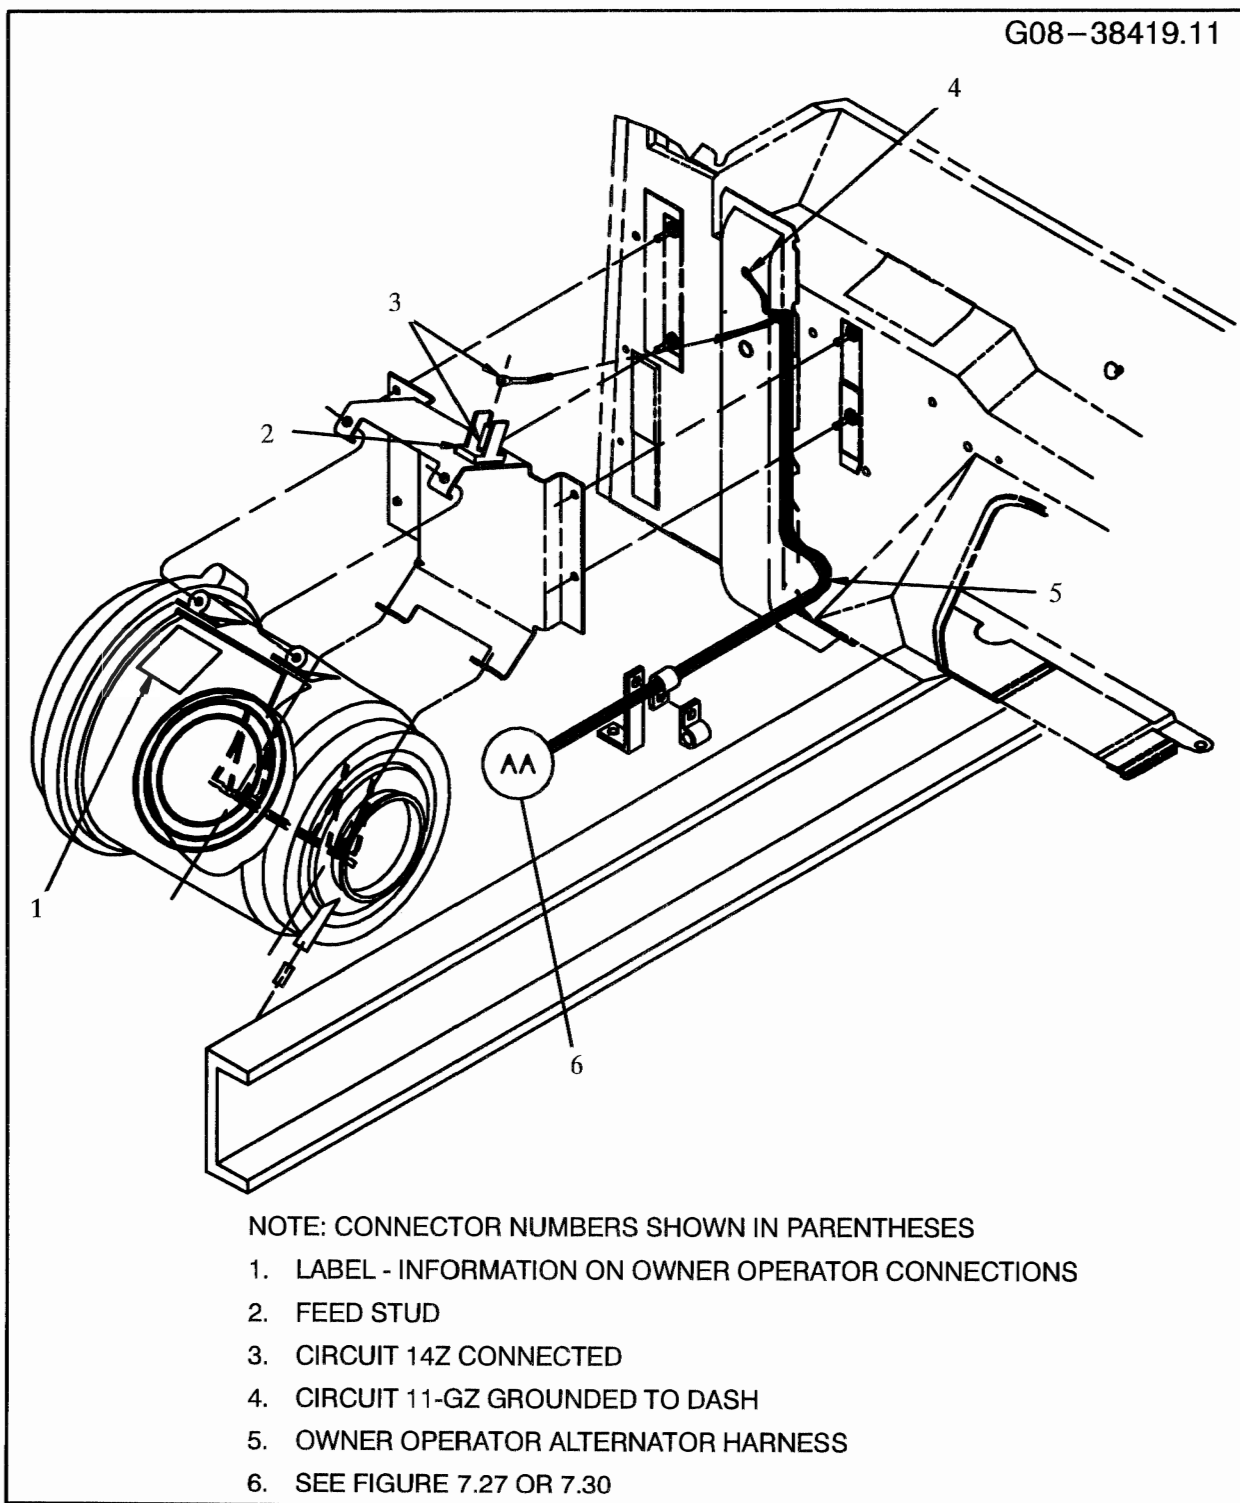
V8 Electronic Engine Wiring (Truck W/ Leece-Neville 2600JA 12V/160A Alternator W/4 Gauge Protection)
